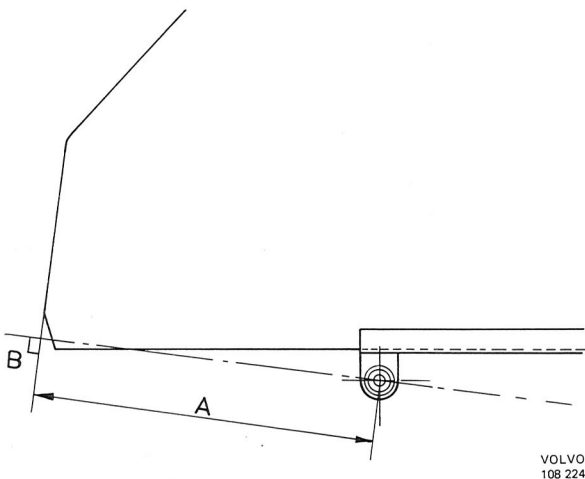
Window dimensions, 142 and front door 144, 145
